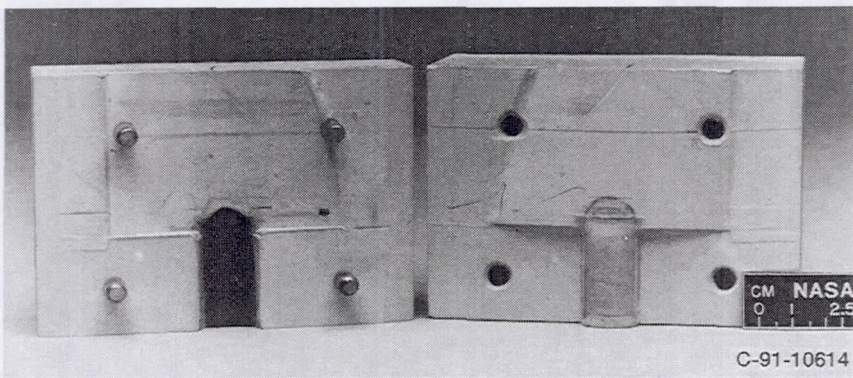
Mold used to compact "thumb ply" filler pieces.
